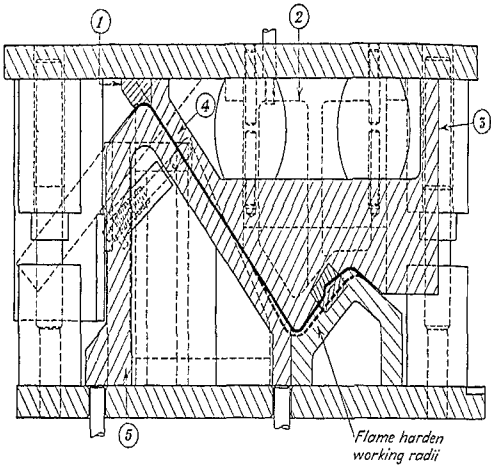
Section through die to produce part shown in Fig. 12-13.
